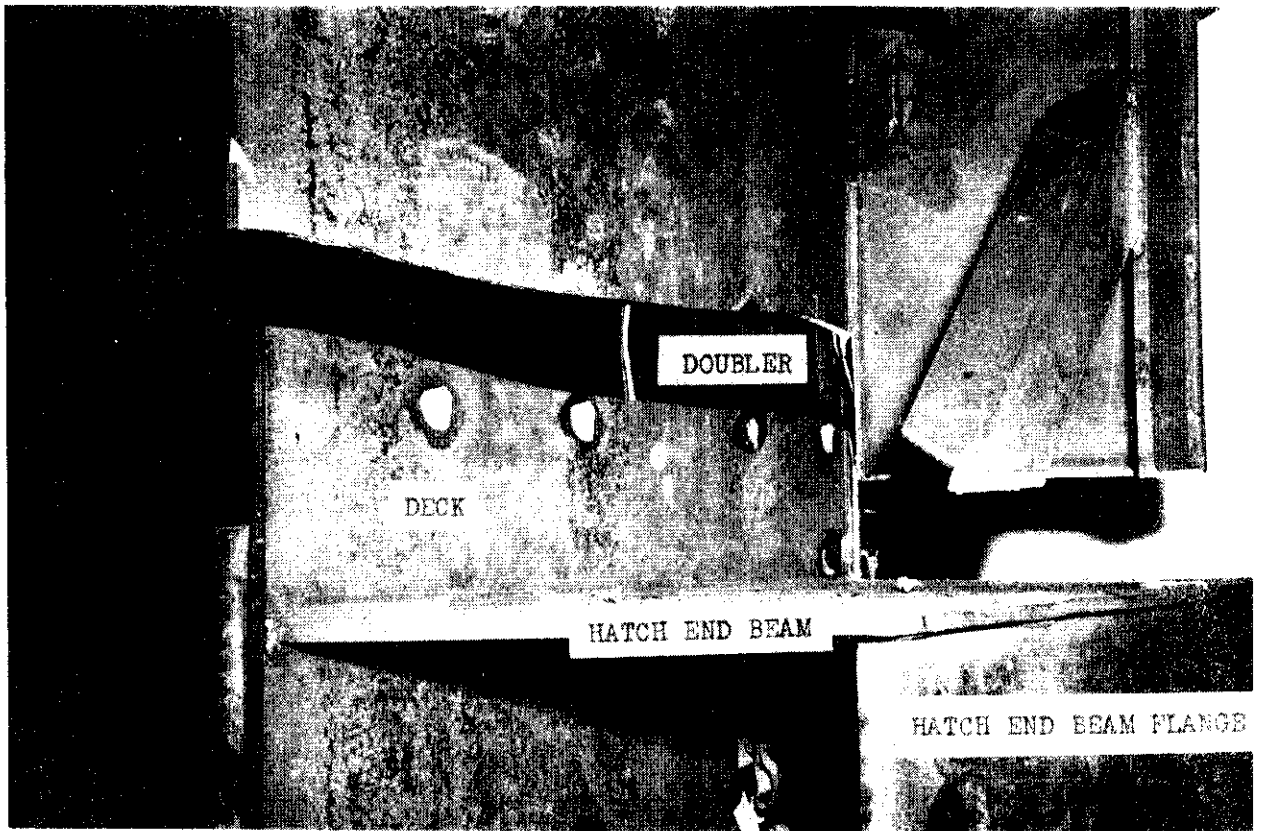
Specimen 30: View of fractures from below deck and outboard
